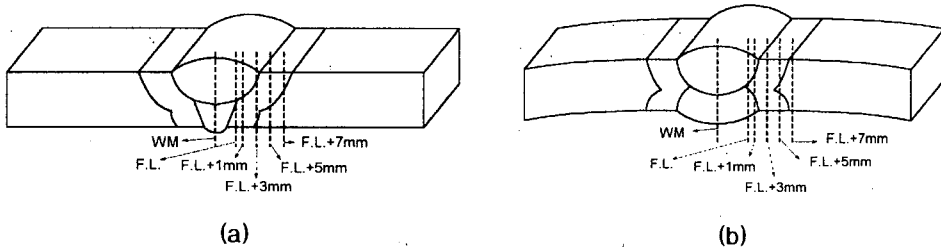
Tested position of fracture toughness test; (a) girth and (b) seam weldment.
